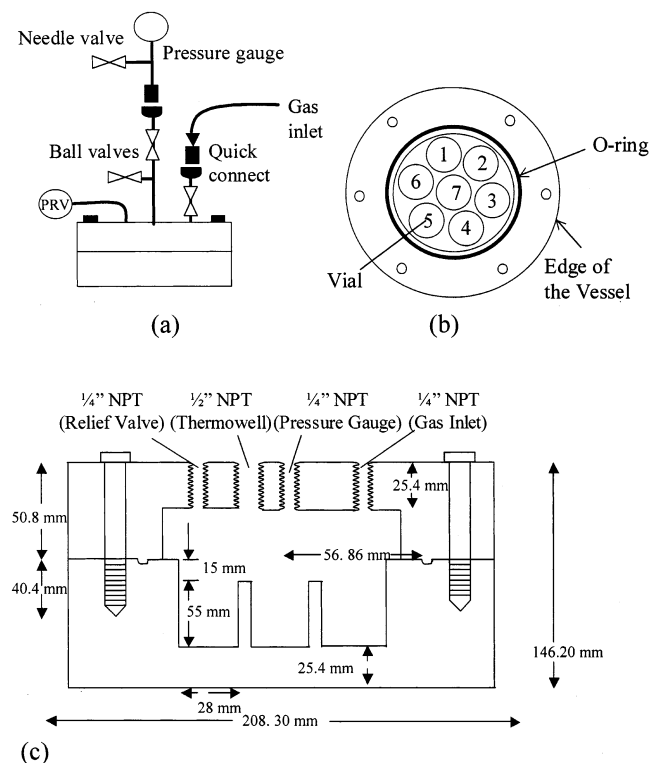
Schematic of the multiwell reaction vessel: (a) fully assembled, side view; (b) top-view of the bottom section, enlarged to show the internal dimensions; (c) side view, with dimensions.
